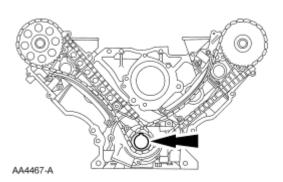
Crankshaft With Keyway At 12 O'clock Position Courtesy of FORD MOTOR CO.
